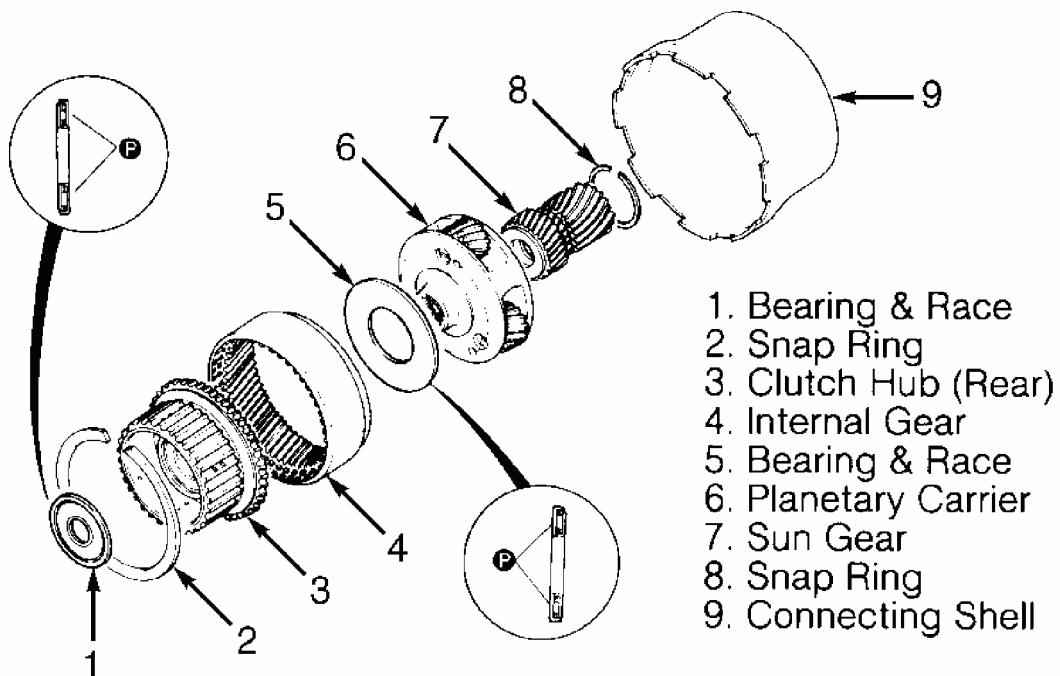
Exploded View Of Front Planetary Gear (MPV, RX7 & 929)
